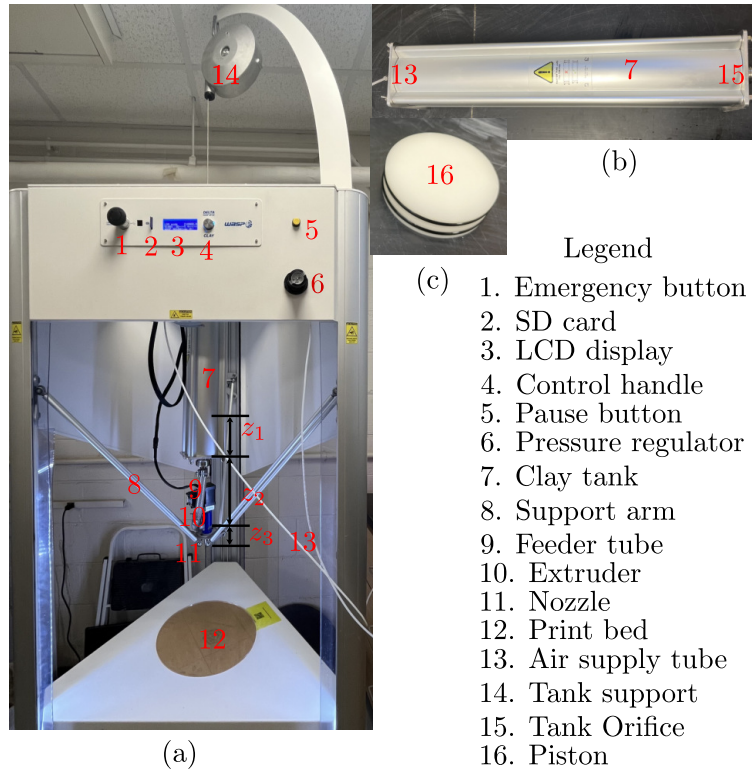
Annotated View of a Clay 3D Printing Setup: Identifying Key Components and Control Features: (a) WASP 40100 clay 3D printer (b) Clay tank (c) Piston
